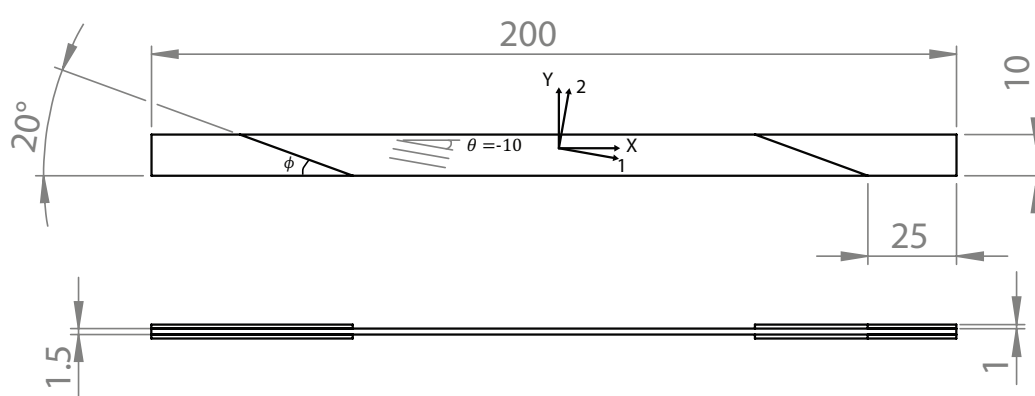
Dimensions of the specimen with oblique end-tab. All dimensions in millimeters.
